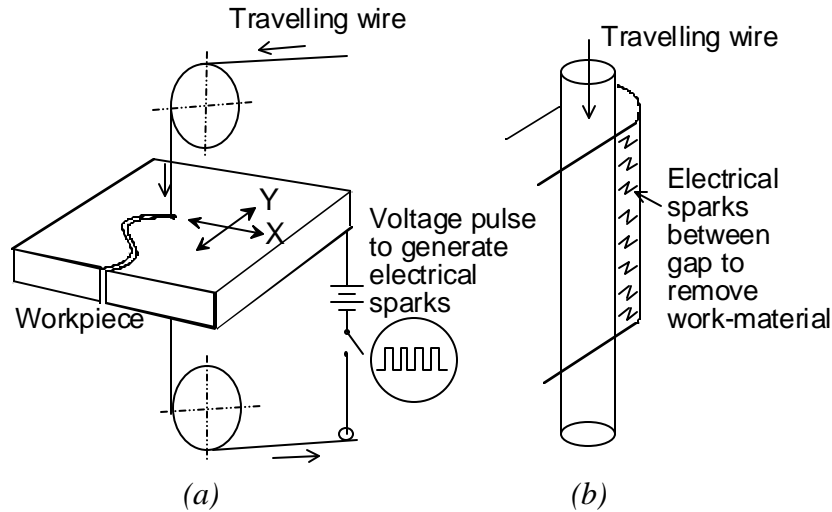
The wire EDM process, (a) conventional 2D wire EDM operation, (b) enlarged view of the wire and workpiece.
